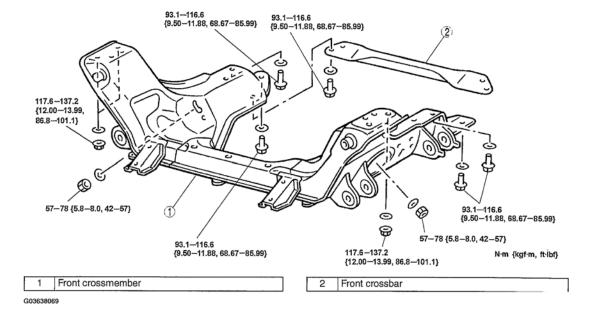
View Of Front Crossmember & Torque Specifications Courtesy of MAZDA MOTORS CORP.
